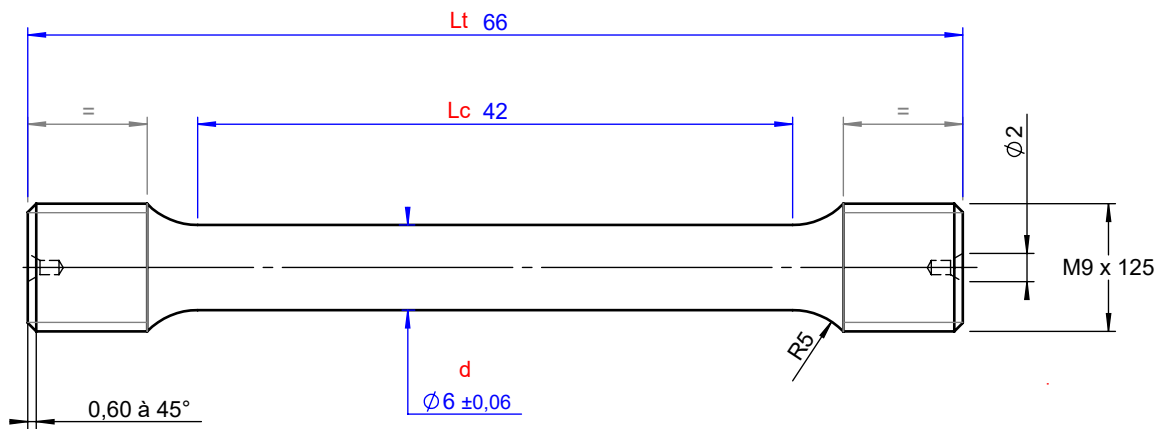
TC6 specimen geometry. Dimensions are in millimeters.
